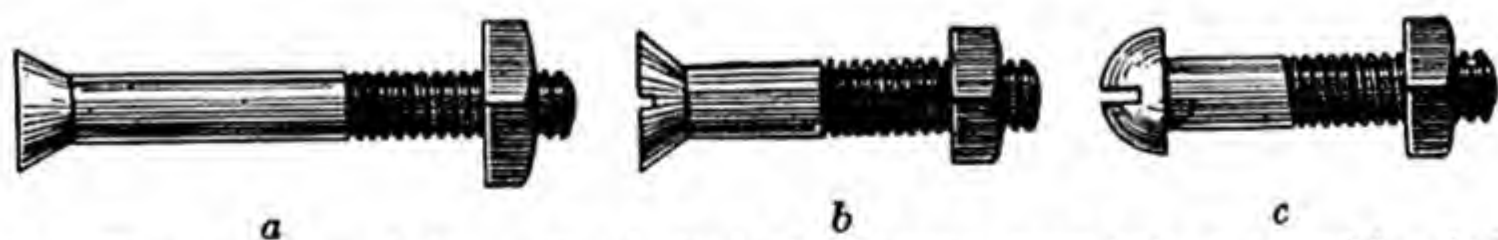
Tire and stove bolts: a, tire bolt; b, flat-headed stove bolt; c, round-headed stove bolt.
